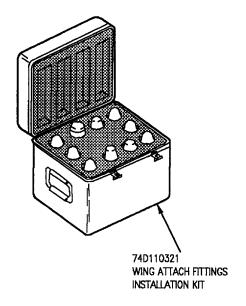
Inner Wing Removal and Installation Attachments (Sheet 10)
